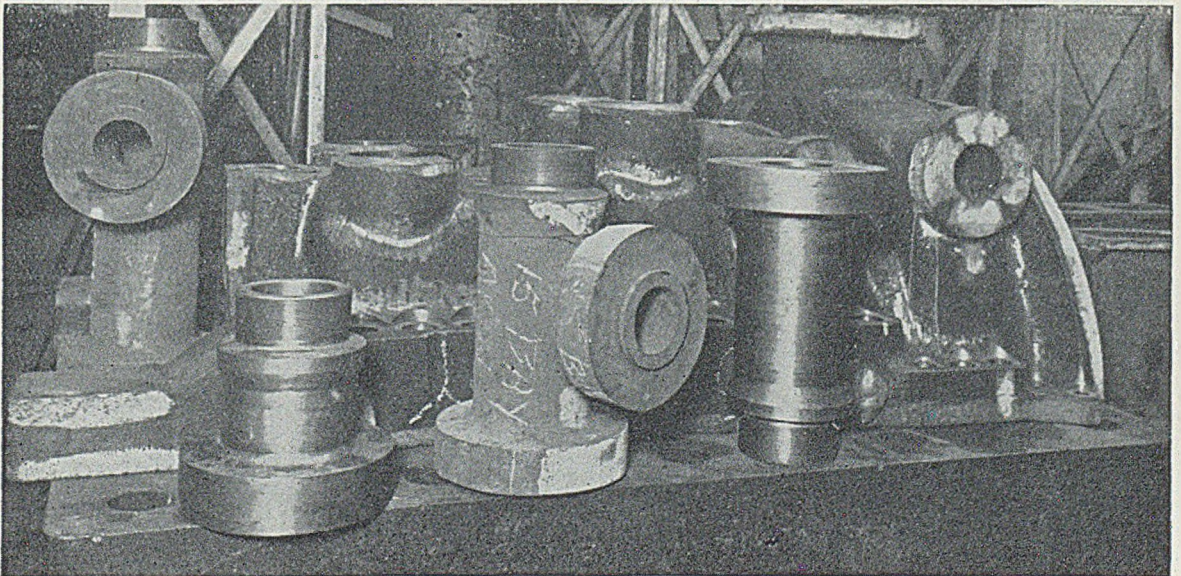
Component Parts of Composite Assembly for a Large Turbine Casting.
